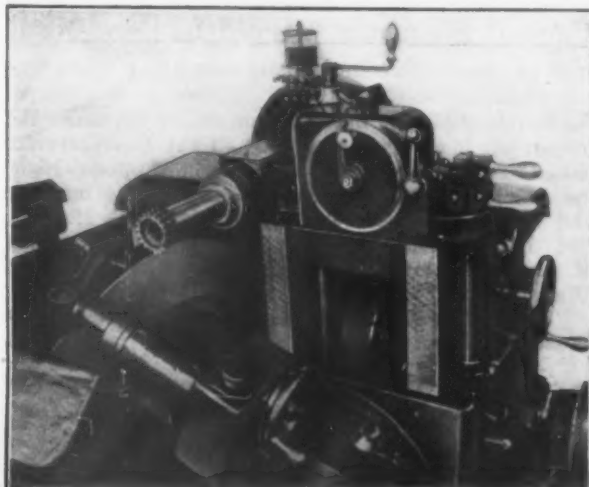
Wheel Head Swiveled to Right 20 Deg.
